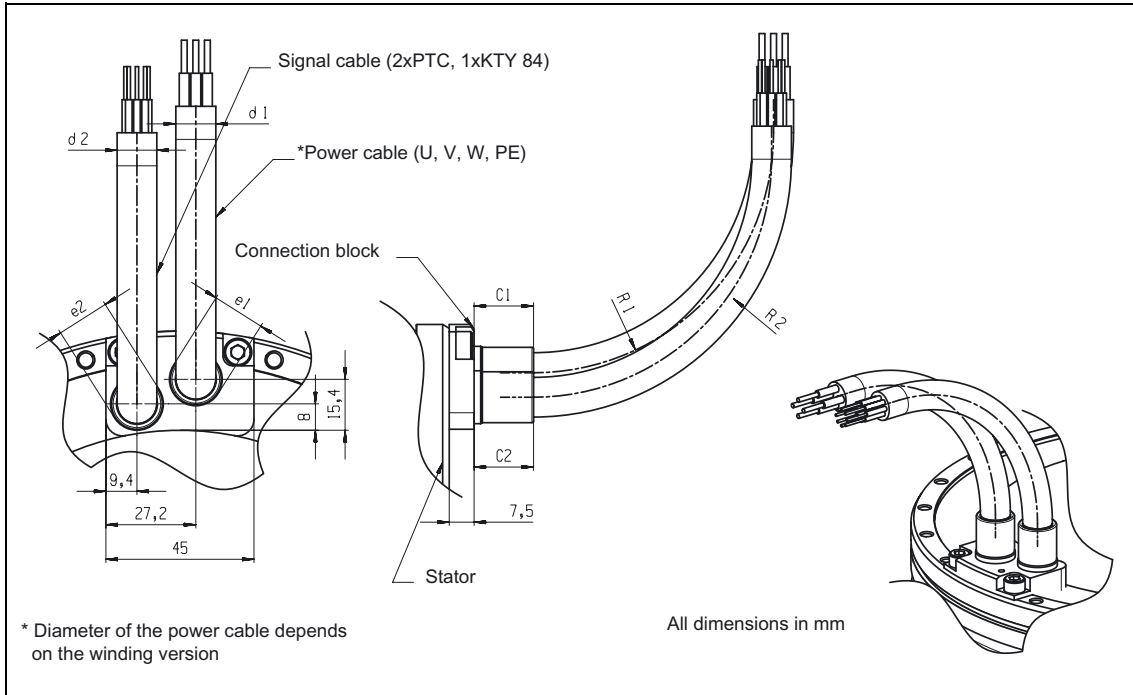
Axial electrical connection with sleeve for 1FW6090 (motor type B)
